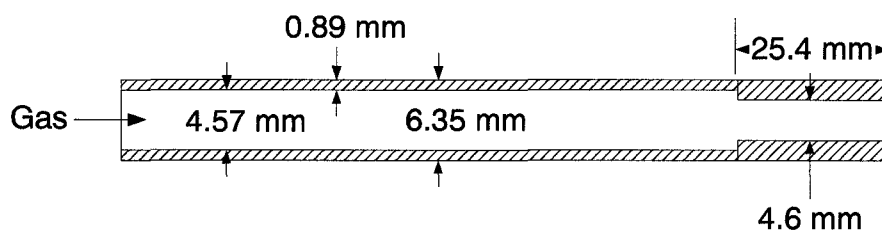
Base Case Straight Tube Attrition Nozzle (Type C Nozzle)
